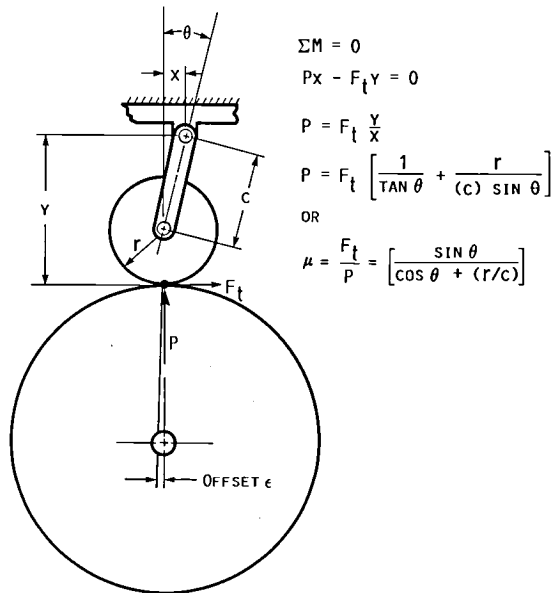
SELF-LOADING ROLLER DRIVE GEOMETRY.
